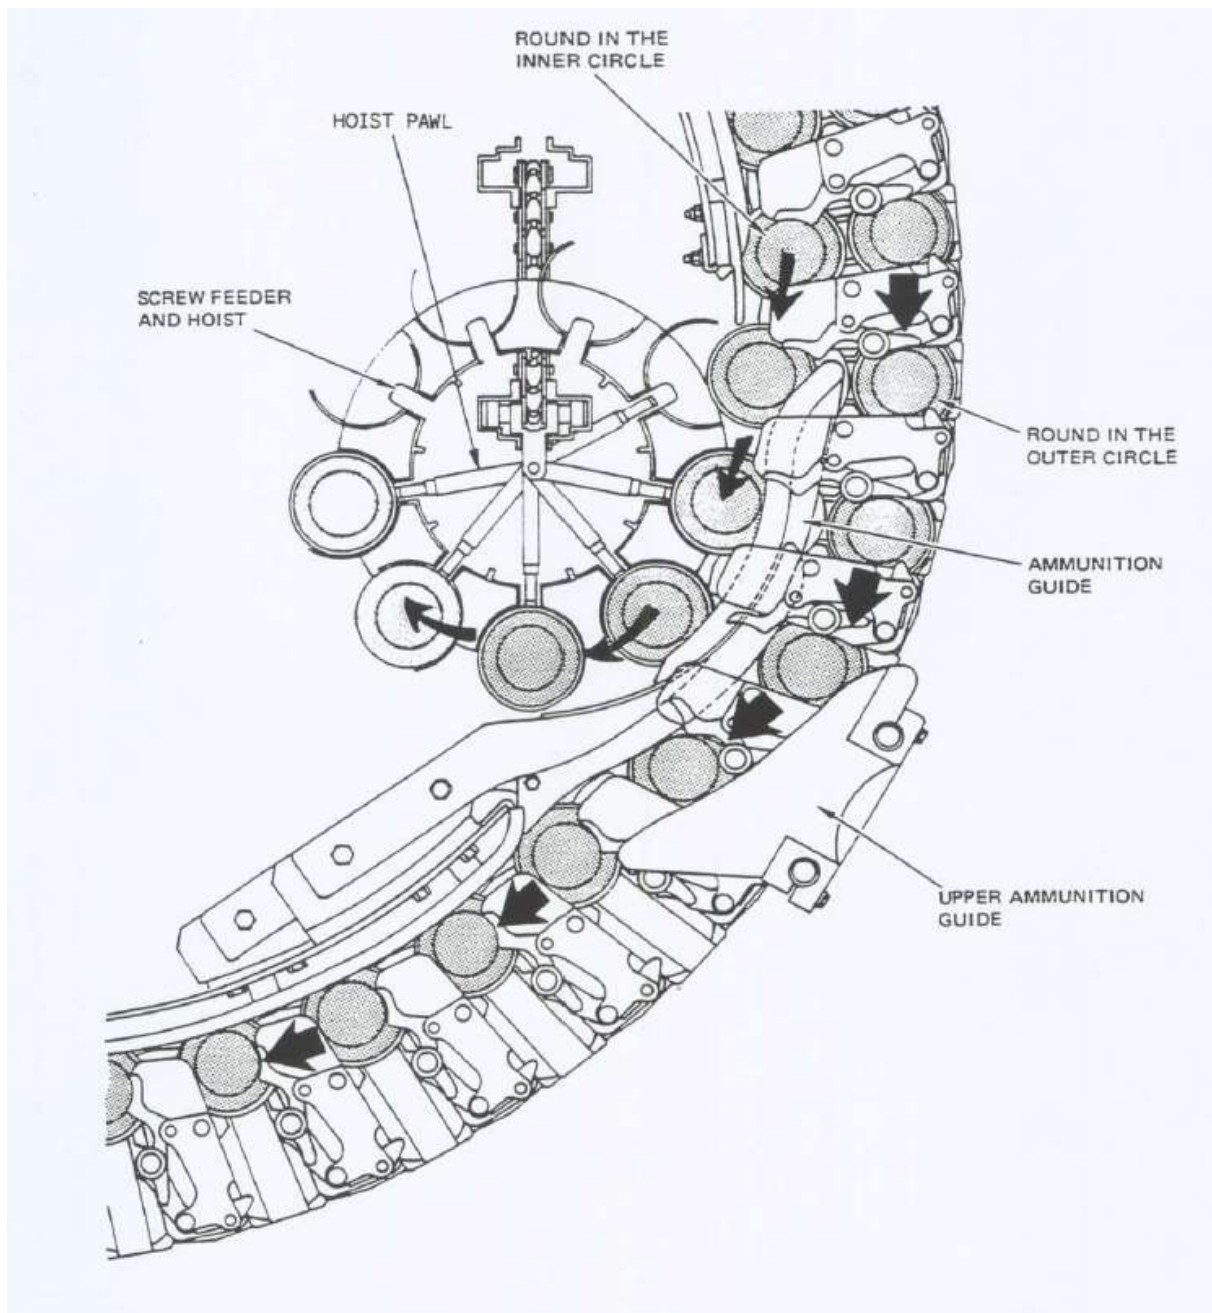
Transfer of Rounds from Outer Ring to Inner Ring to Screwfeeder
